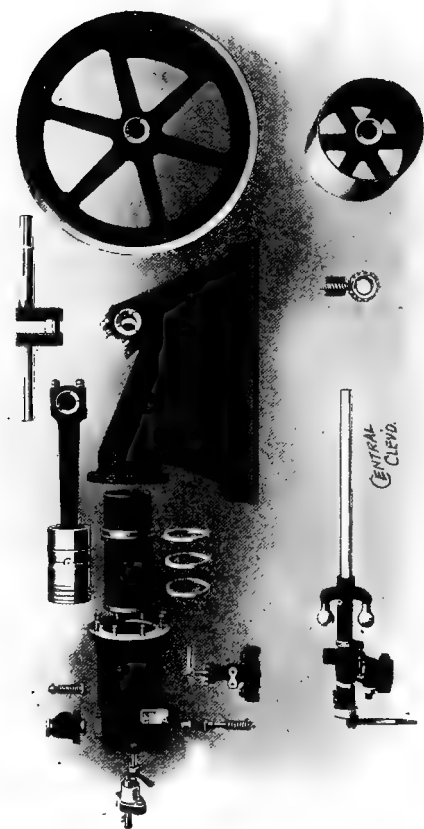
Vital Parts of a Jacobson Horizontal Gas Engine.
